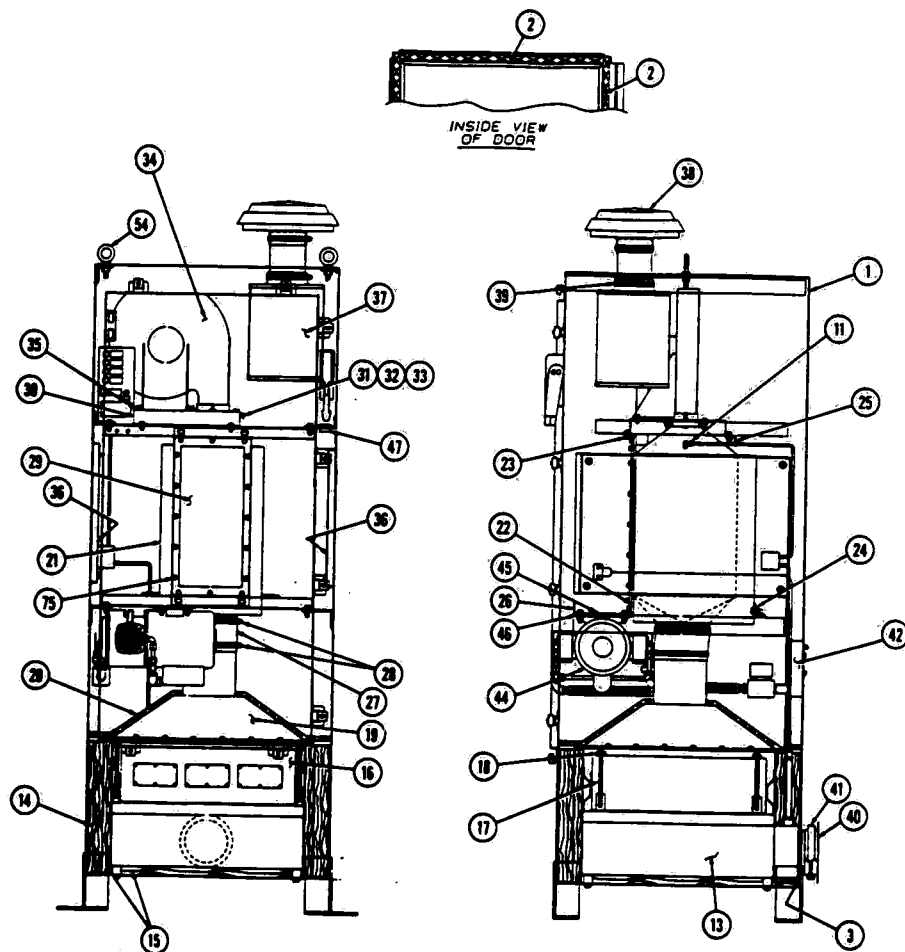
EO Disposer Assembly (Part 1 of 3)
